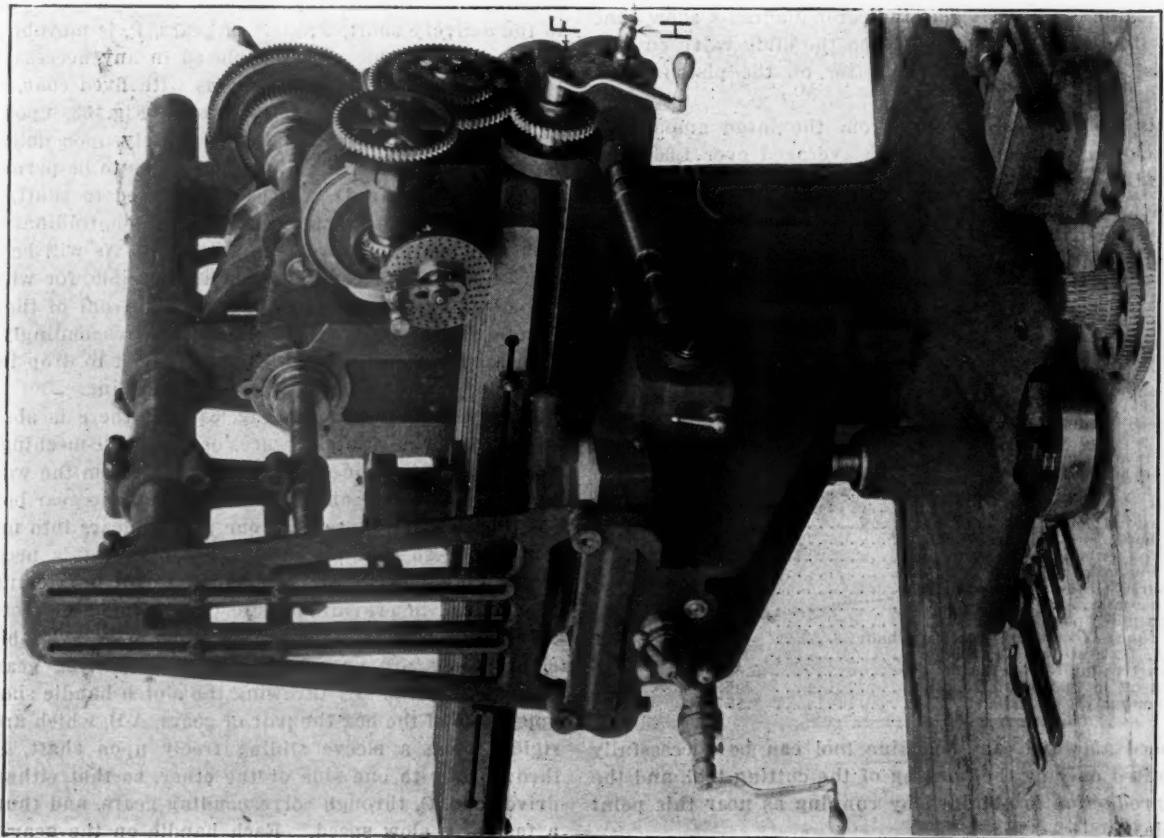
GENERAL VIEW OF THE NEW NO. 3 MILLING MACHINE.
